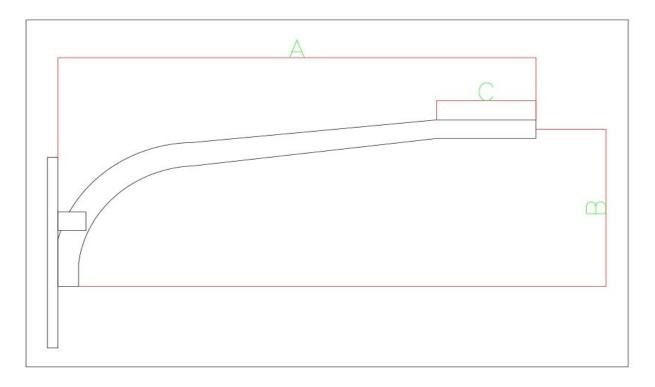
Illustration of the streetlight bracket for wood or concrete pole mounting
